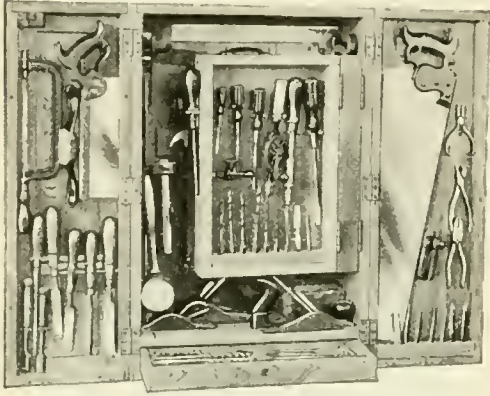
A well arranged cabinet to hold all the necessary tools for hand wood-working
